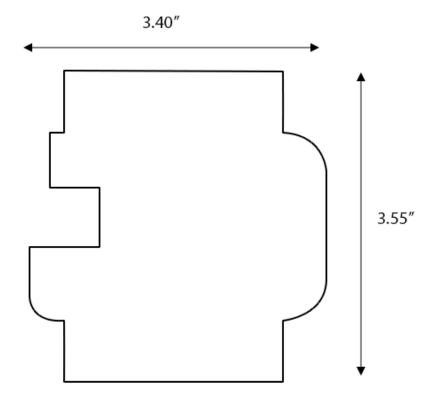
BeagleBone LCD3 Cape Dimensions Drawing
